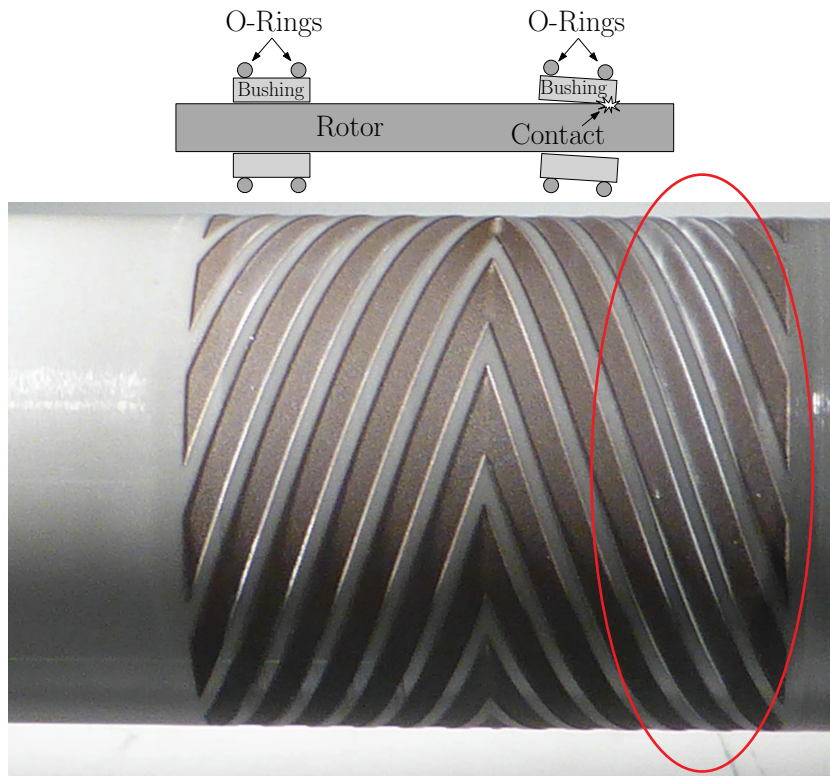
Wear on HGJB due to misalignment, visible by the accumulation of white dust in the bearing grooves of a silicone-nitride rotor shaft
